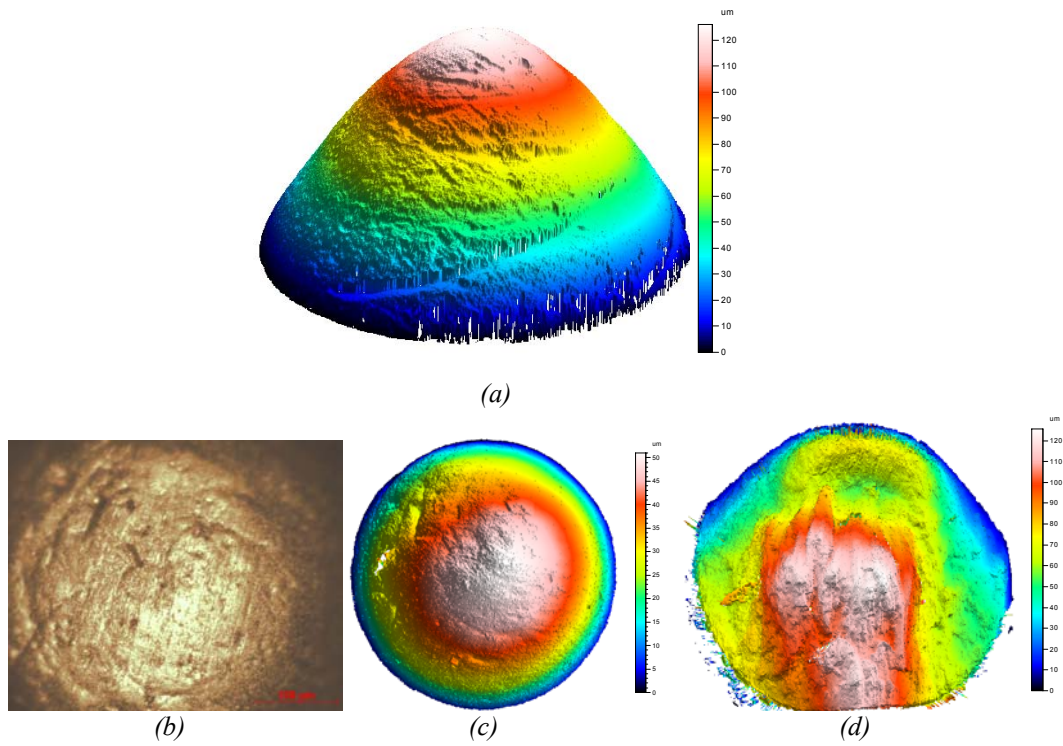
Contact surface pictures for DC 53 sample with TD coating (Sample # 6-2) before test obtained by (a) side view with confocal, (b) top view with optical, (c) top view with confocal microscope; (d) after test view of contact surface obtained by confocal microscope
